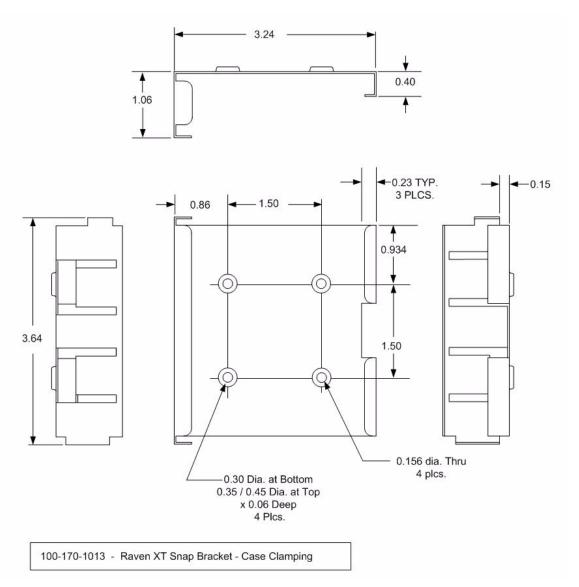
100-170-1013 : Mounting Bracket for Raven XT
